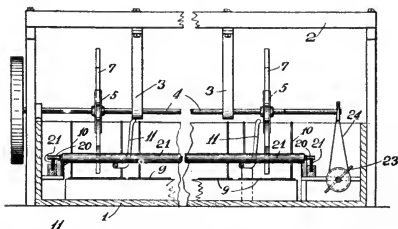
TRANSVERSE SECTION OF POTTHOFF TUBE MACHINE
